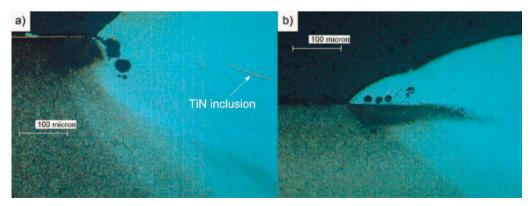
Laser welds on duplex-treated surfaces; a) nitrided and TiN-coated surface, b) nitrided and CrN coated surface
